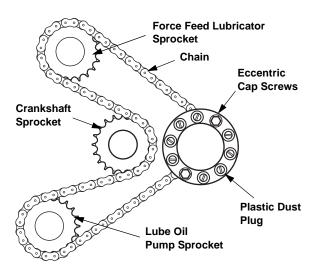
CHAIN DRIVE SYSTEM - TYPICAL
